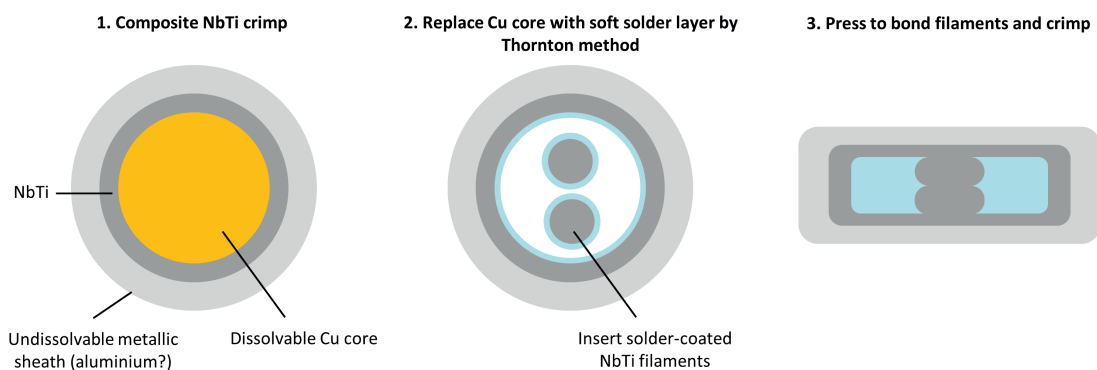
A composite NbTi crimp design that could be incorporated into the solder-coating/cold pressing technique.
